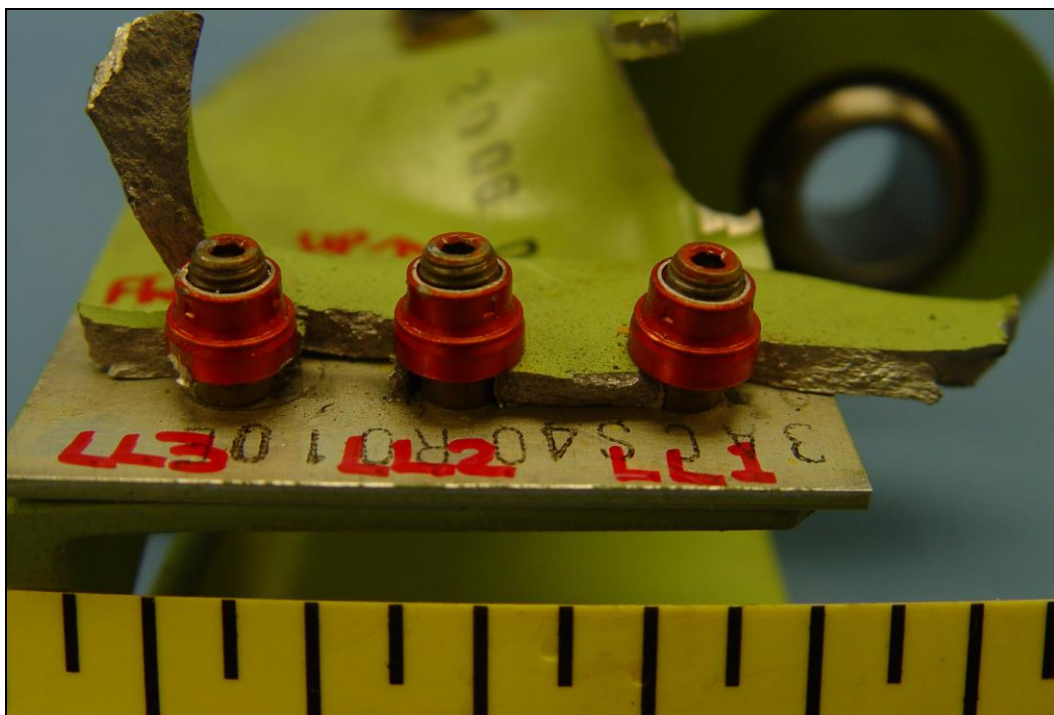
Overload stress fracture and shear detail *(NTSB)
